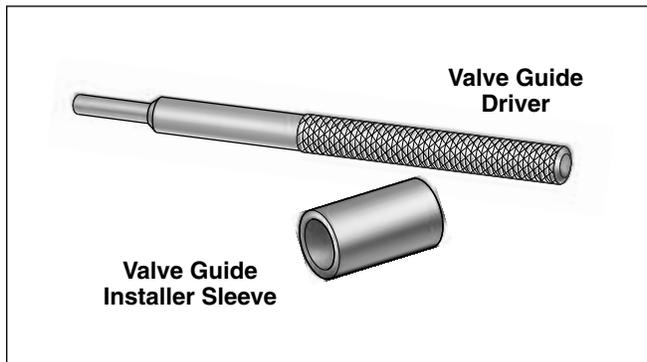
Valve Guide Driver (Part No. B-45524-1) and Valve Guide Installer Sleeve (Part No. B-45524-2A)
